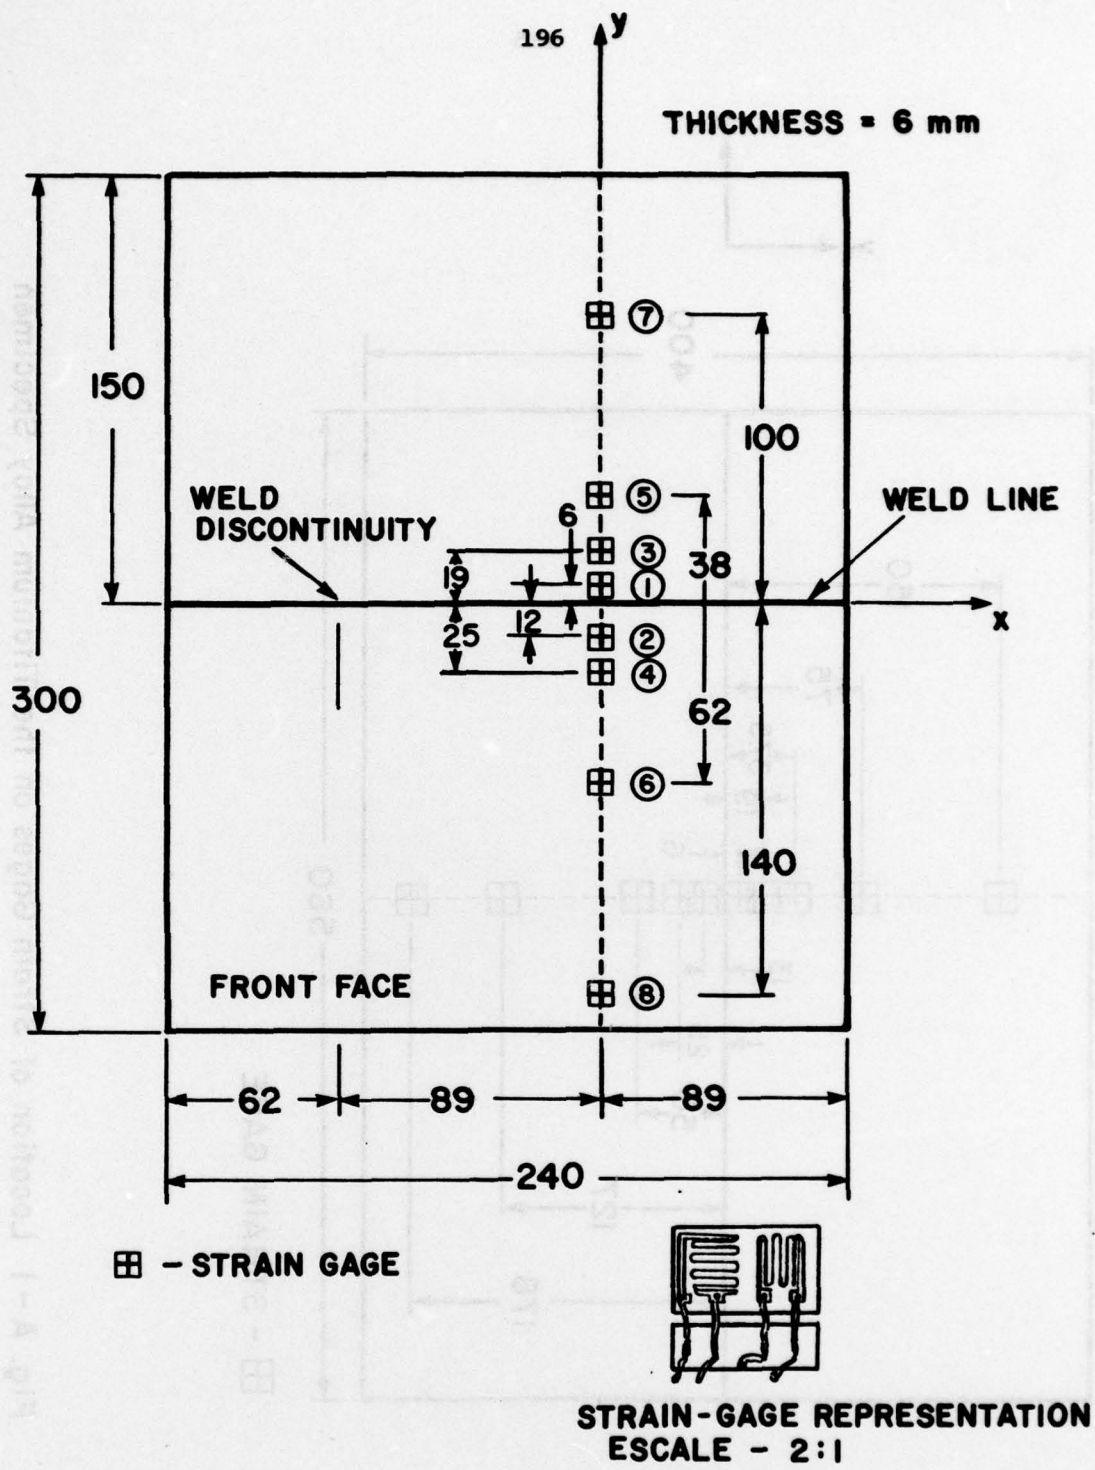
Inconel 718 Specimen - Dimension and Strain-gages Position
